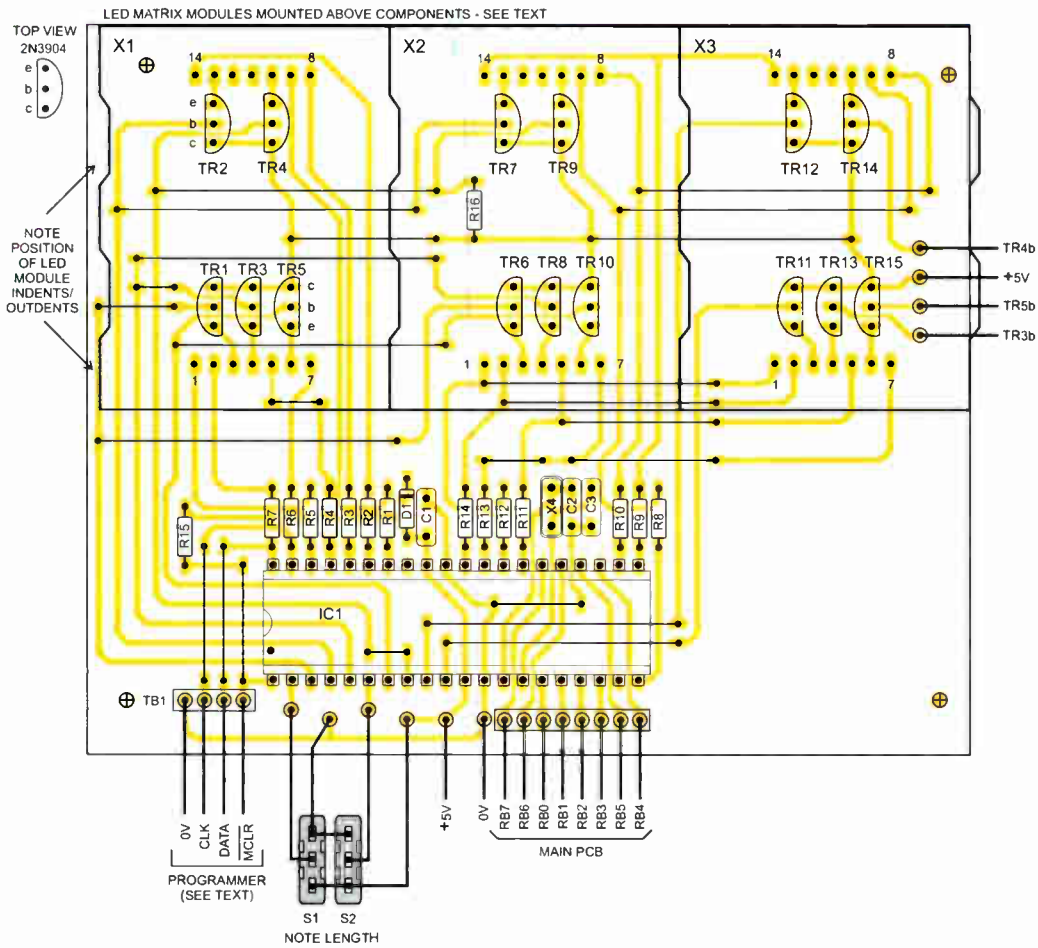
printed circuit board component layout, full-size copper foil master and off-board wiring details for the LED Display Interface
